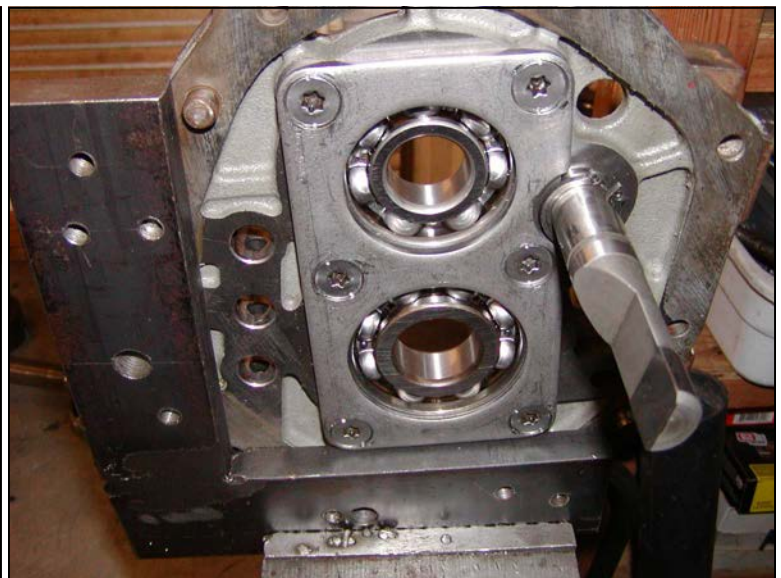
Installation of main and countershaft bearings. Install using pressure on the outer race, not inner.
